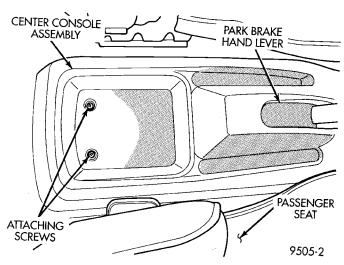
Attaching Screws At Rear Of Center Console With/Without Arm Rest
